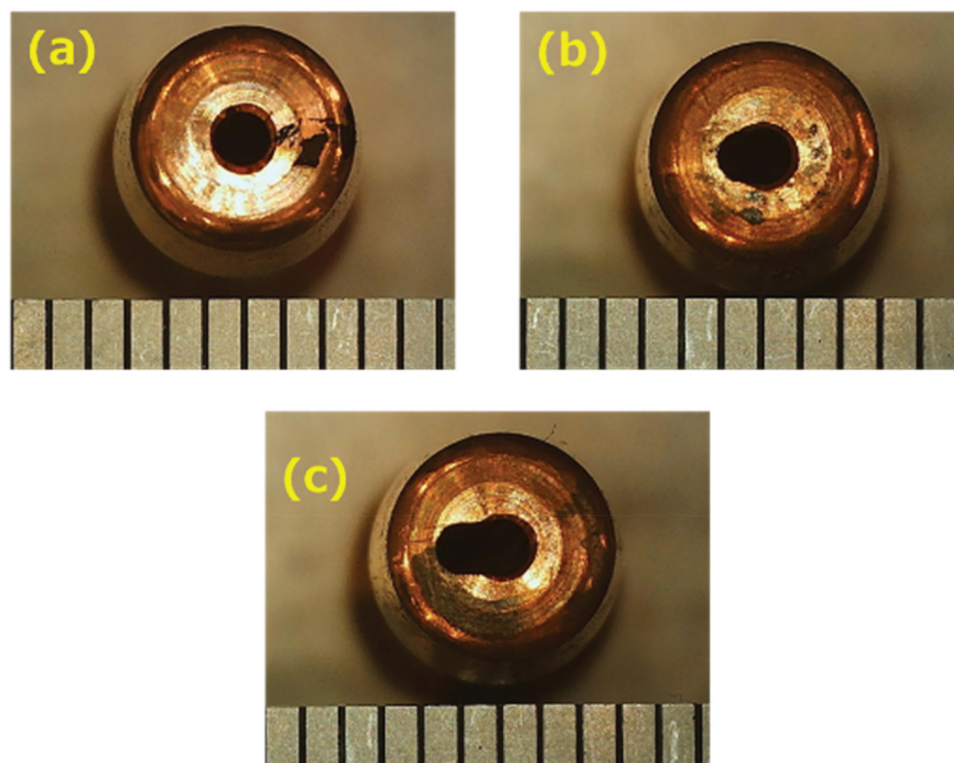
Representative appearances of the emulated welding-tip wear conditions. (a) Tip orifice enlarged by 0.25 mm, (b) 0.5 mm, and (c) 1.0 mm by electrical-discharge machining.
